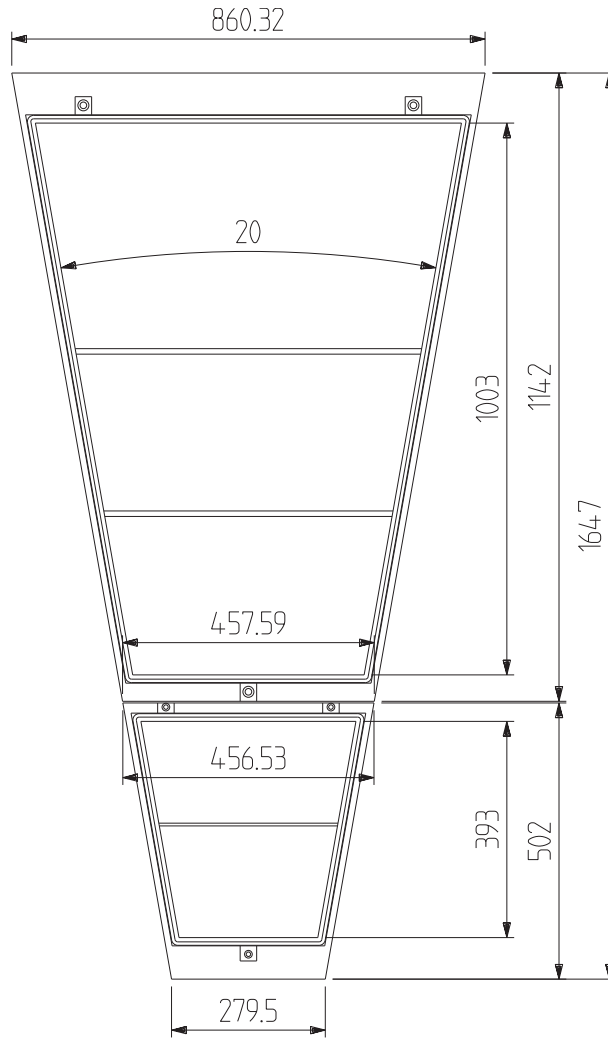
Dimensions (mm) of the ALICE TPC readout chambers.
